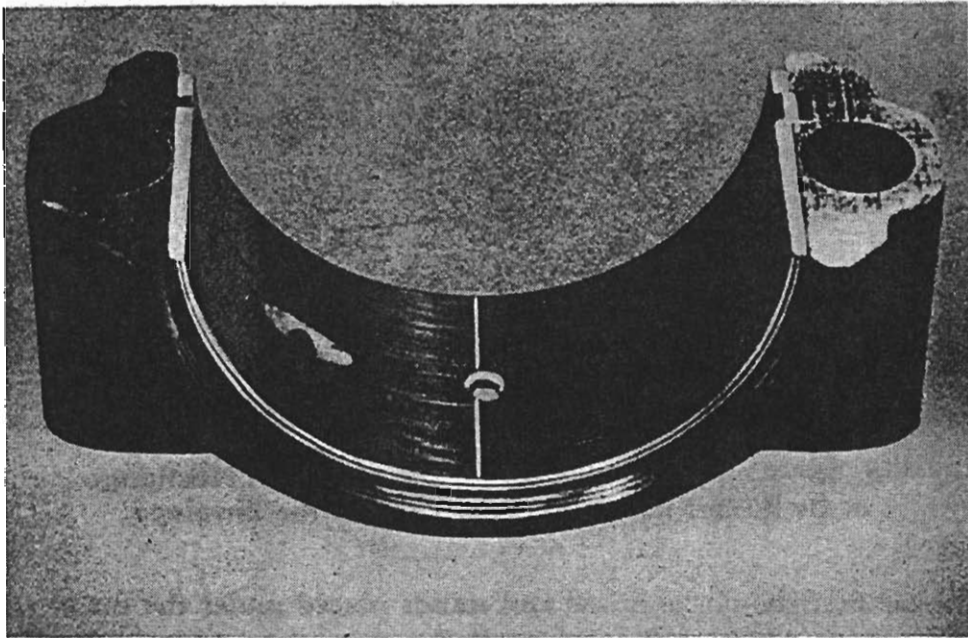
Place a Strip of Plastigage Across the Full Width of the Bearing Shell as Shown.
